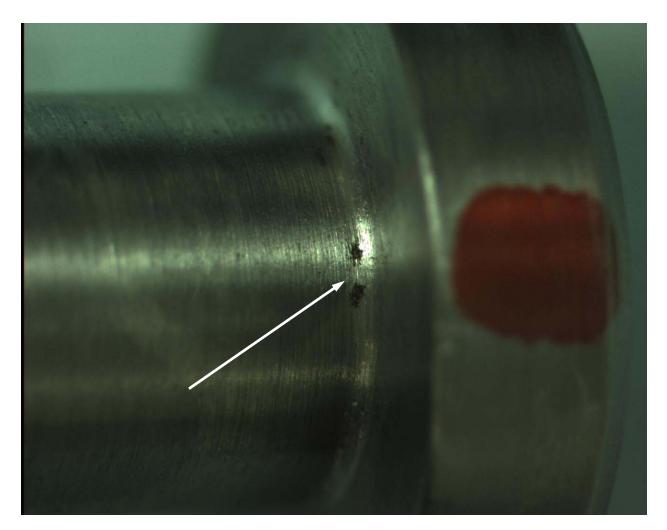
#3 Valve Rod showing ink mark at the approximate location where a PT indication occurred in the machined radius.
